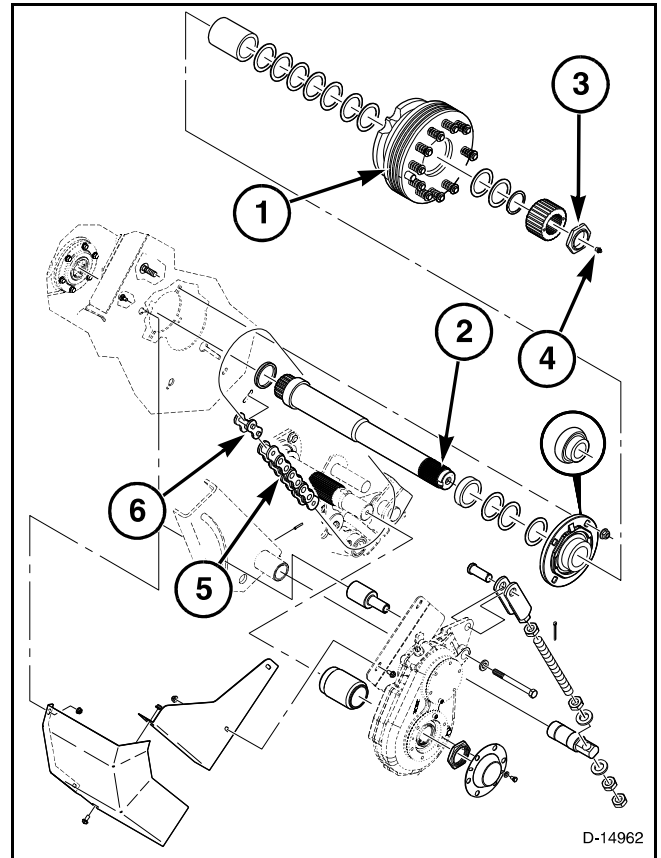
Install the clutch assembly (1) on the shaft (2).
